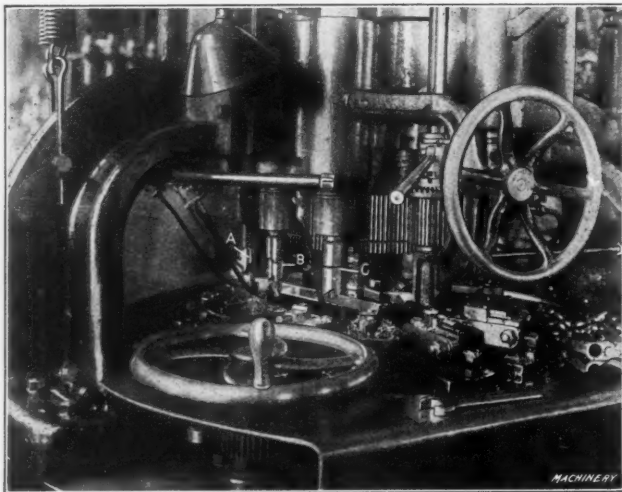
Special Multiple-spindle Machine for drilling, reaming and milling Rifle Receivers
